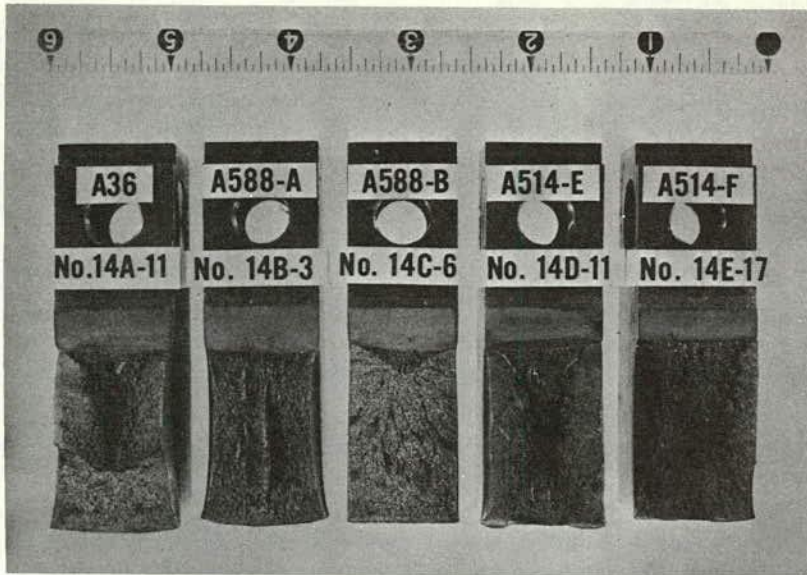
Typical fracture surfaces from 1T WOL specimens tested to fracture under static loading conditions in air at 72 F.
